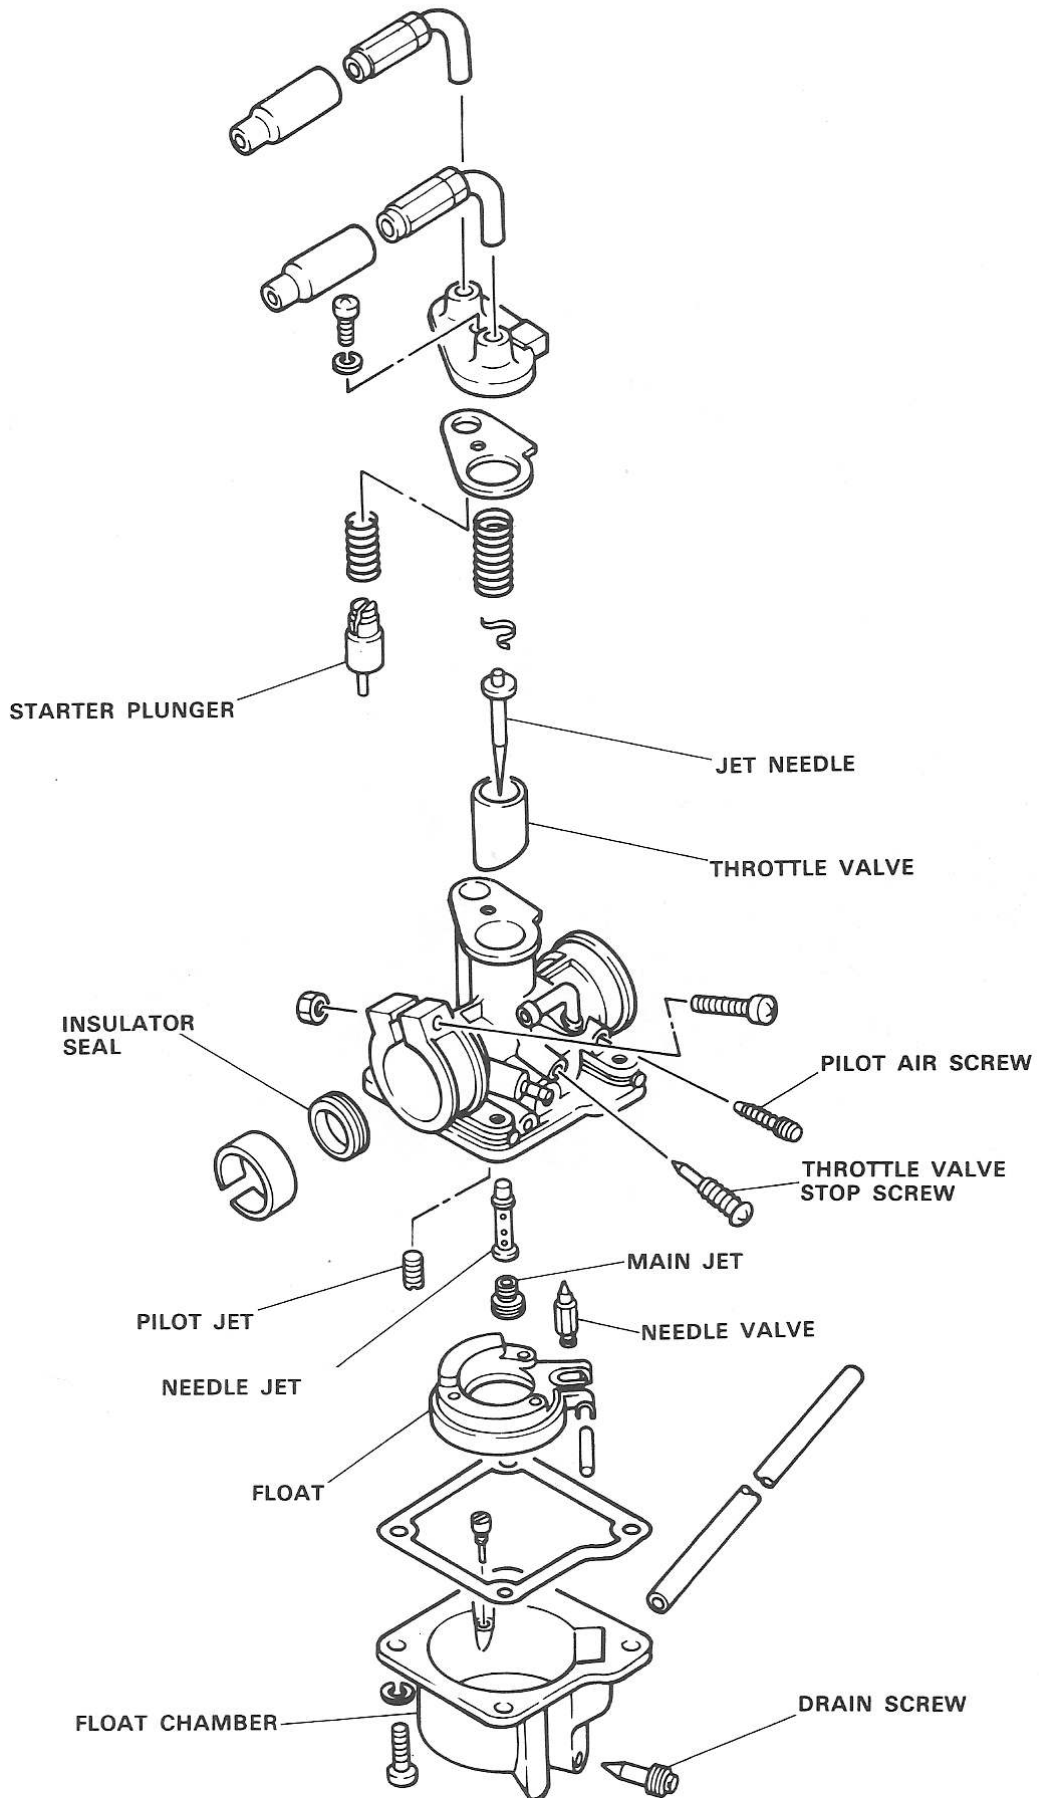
YT 60 carburetor components — exploded view (Sec 5)
